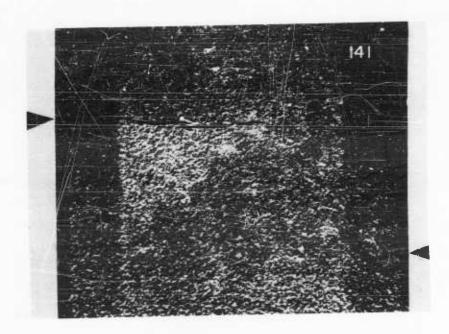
FAILURE IN SPECIMEN NO. 141
